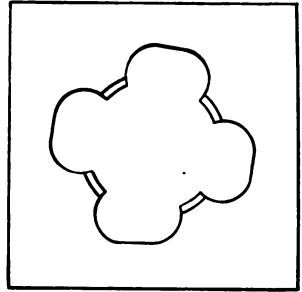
Large Size Square Solid Die, showing Form of Clearance Holes
